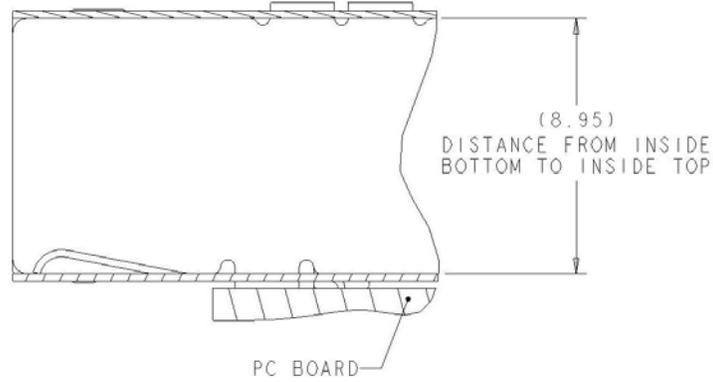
SECTION VIEW OF CAGE ASSEMBLY, INF-8074I
